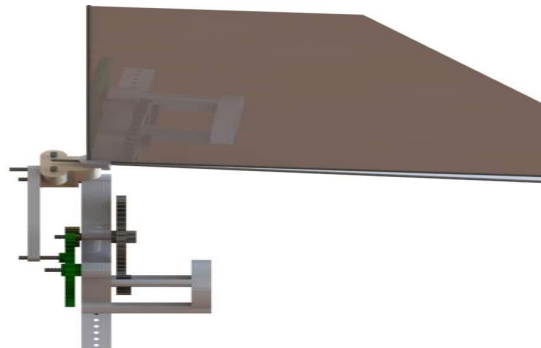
Side View of Flapping Mechanism With Rotation (At a different flapping angle)
